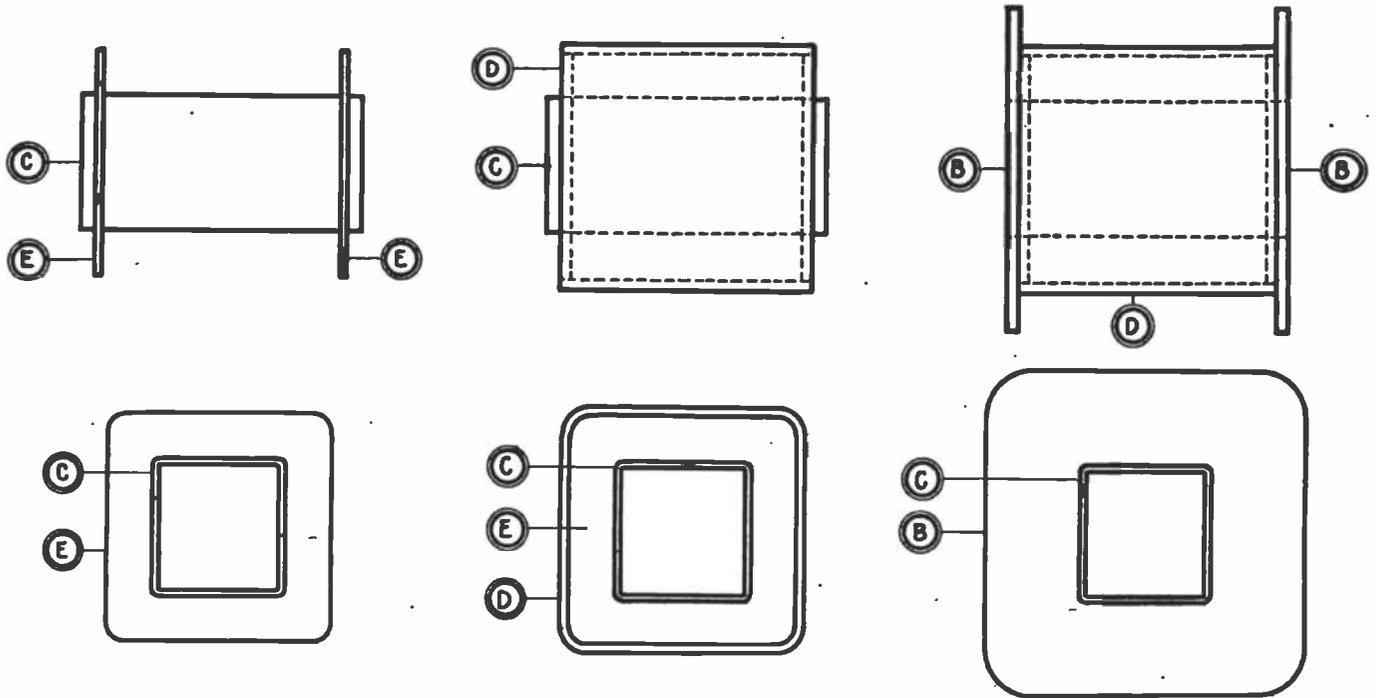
Progressive steps in assembling the cores and end pieces which support the primary and secondary winding
